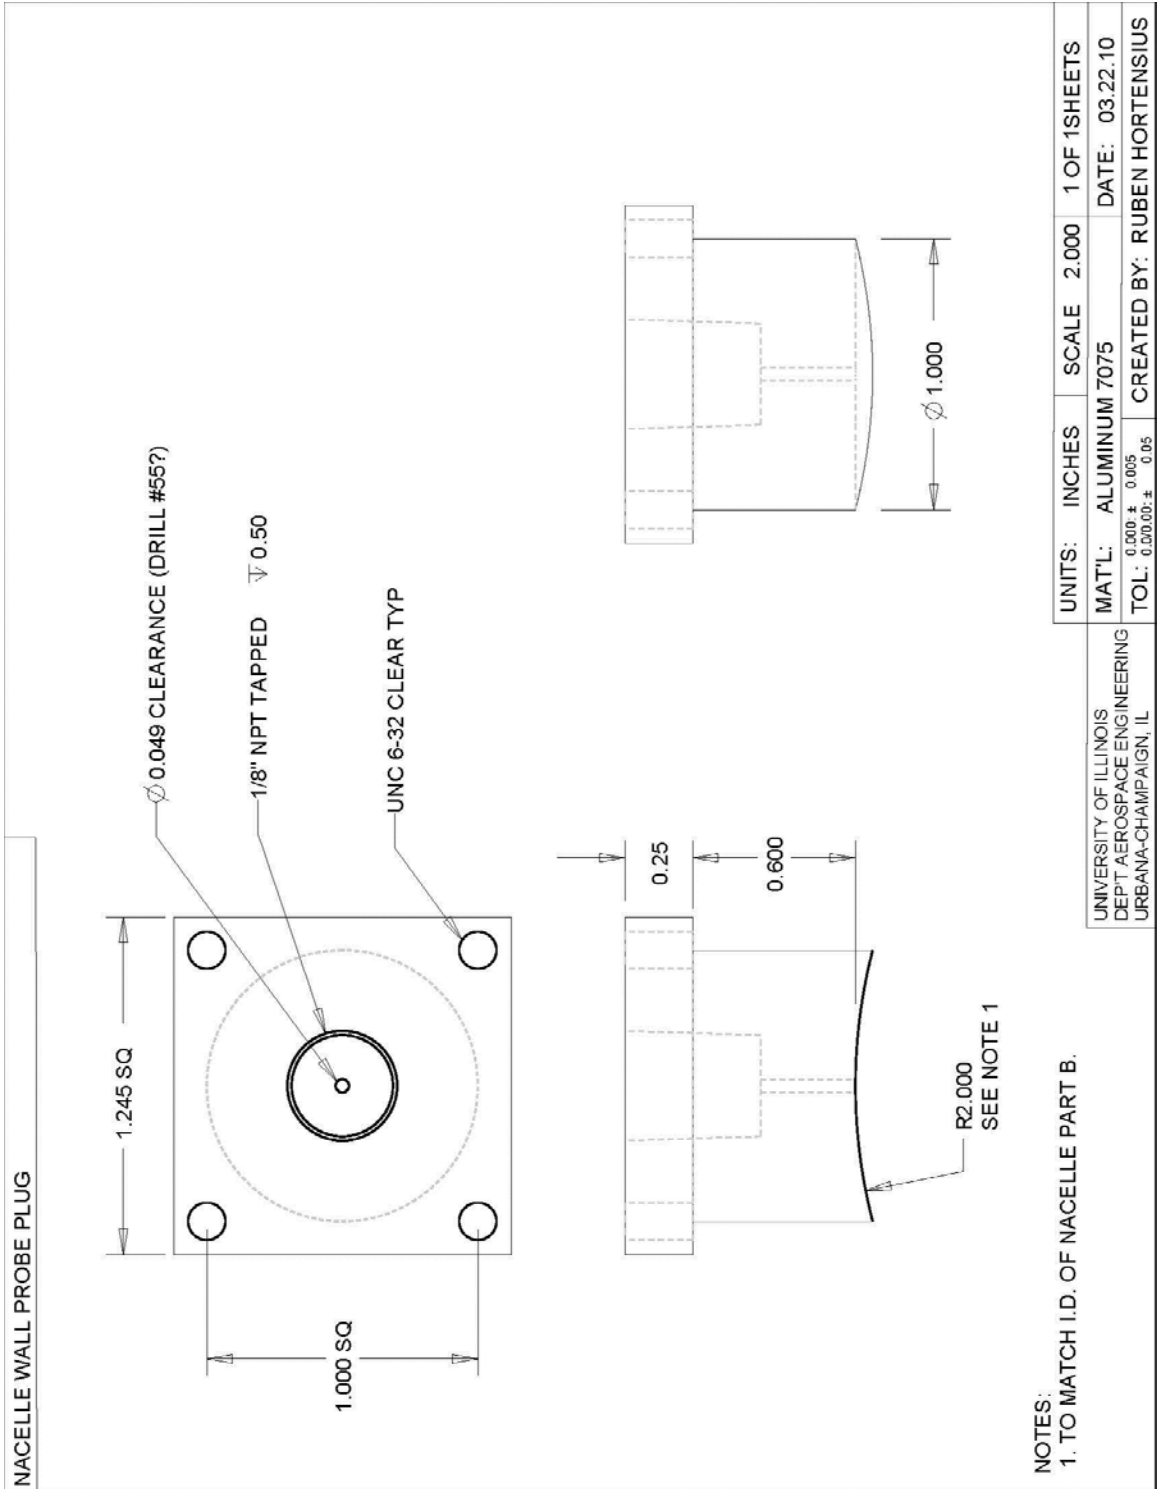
Nacelle Wall Probe Plug Engineering Drawing.
